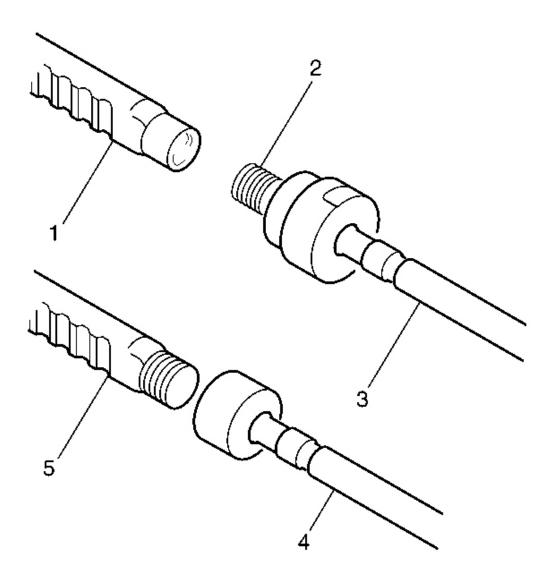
Identifying Tie Rod Male & Female Ends Courtesy of GENERAL MOTORS CORP.
